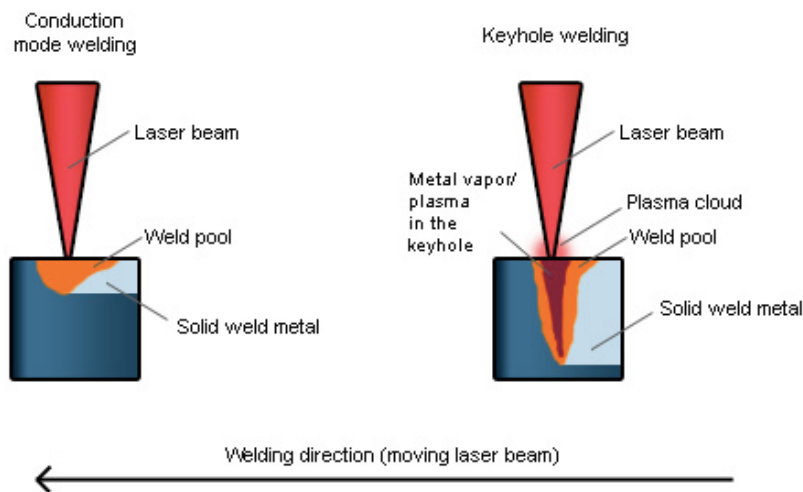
Difference between the “Conduction mode welding” and the “Keyhole welding” (ref. 64).
